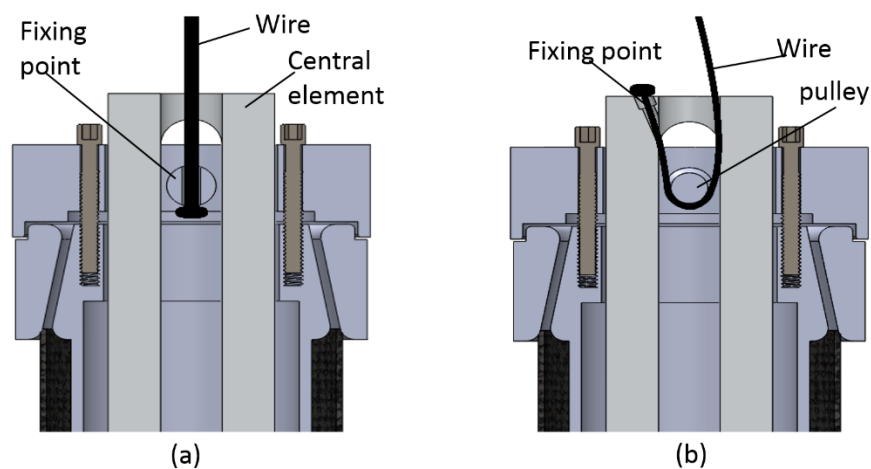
The sliding sleeve muscle end fitting with a cable configured to pull directly (a) and with the pulley mechanism (b).
